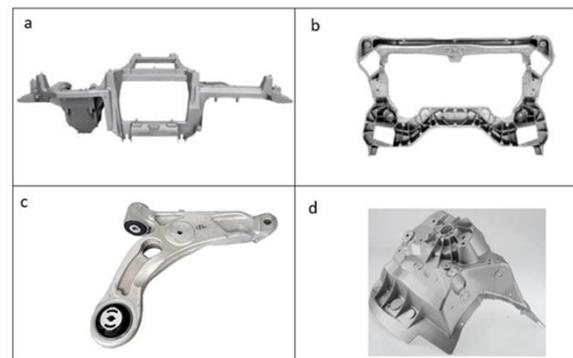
Examples of aluminum cast structural parts: cross car beam (a), engine cradle (b), control arm (c), shock tower (d) [58]
